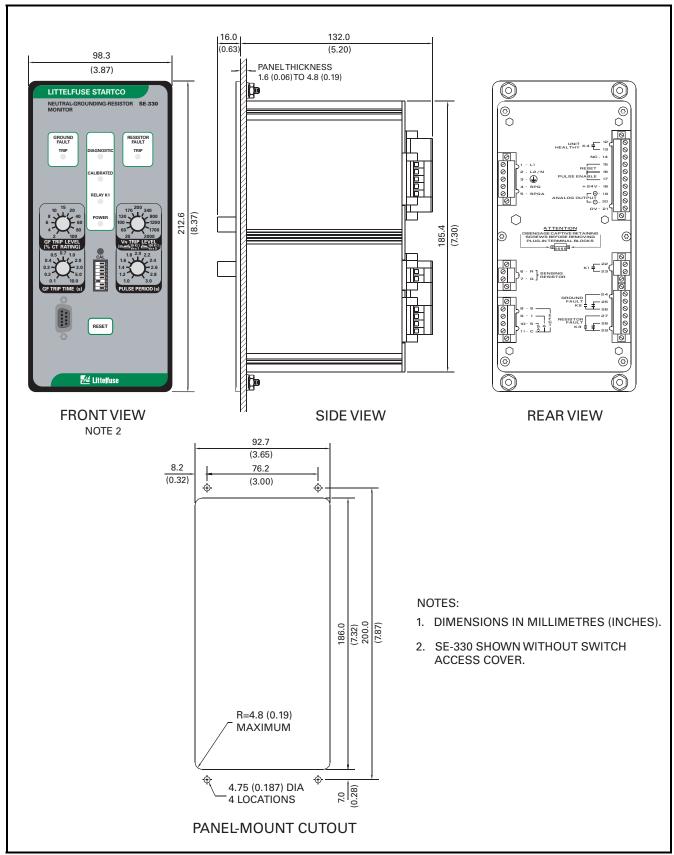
SE-330 Outline and Panel-Mounting Details.
